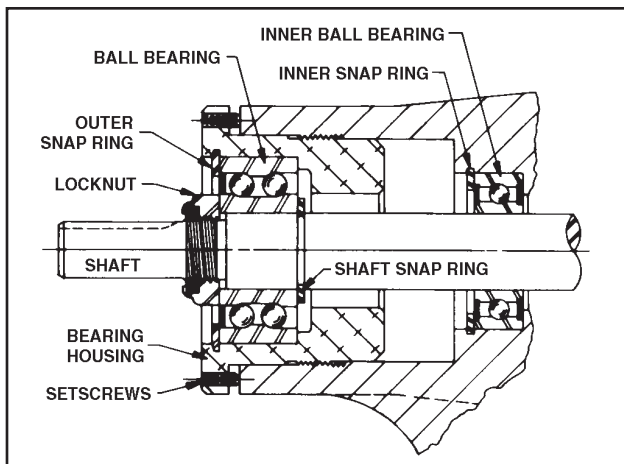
Thrust-Bearing assembly (GG, HJ, HL)
